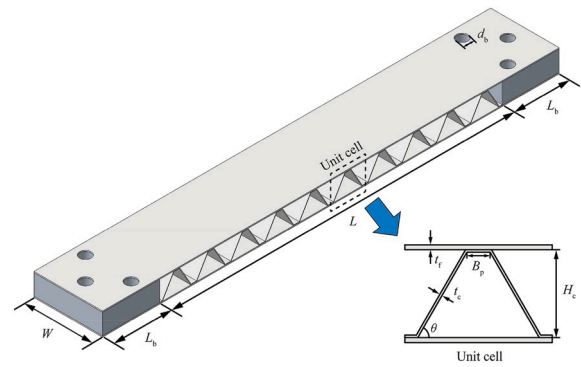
Schematic illustration of corrugated core sandwich beam and its end fixture.
